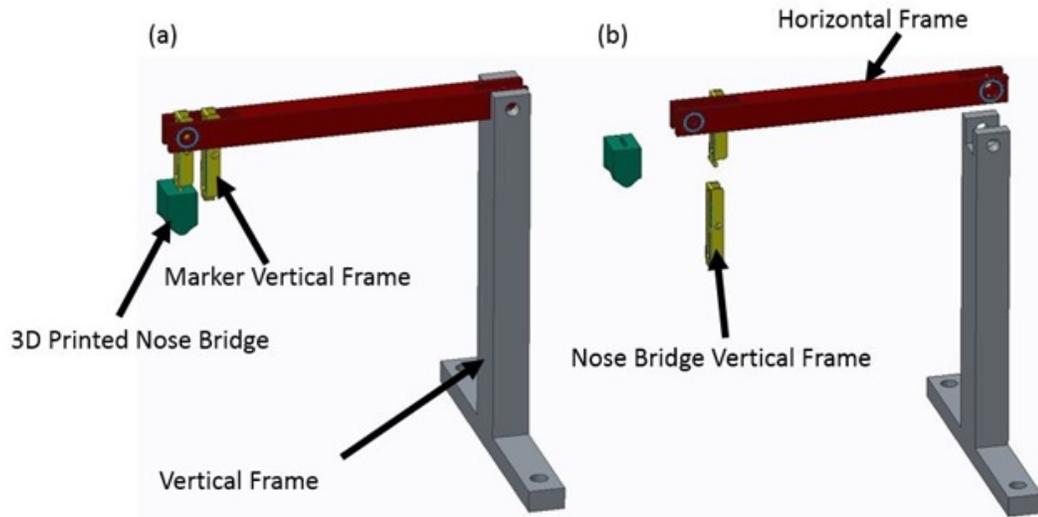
(a) Assembly view of Stereotactic Frame, (b) Exploded View of Stereotactic Frame
